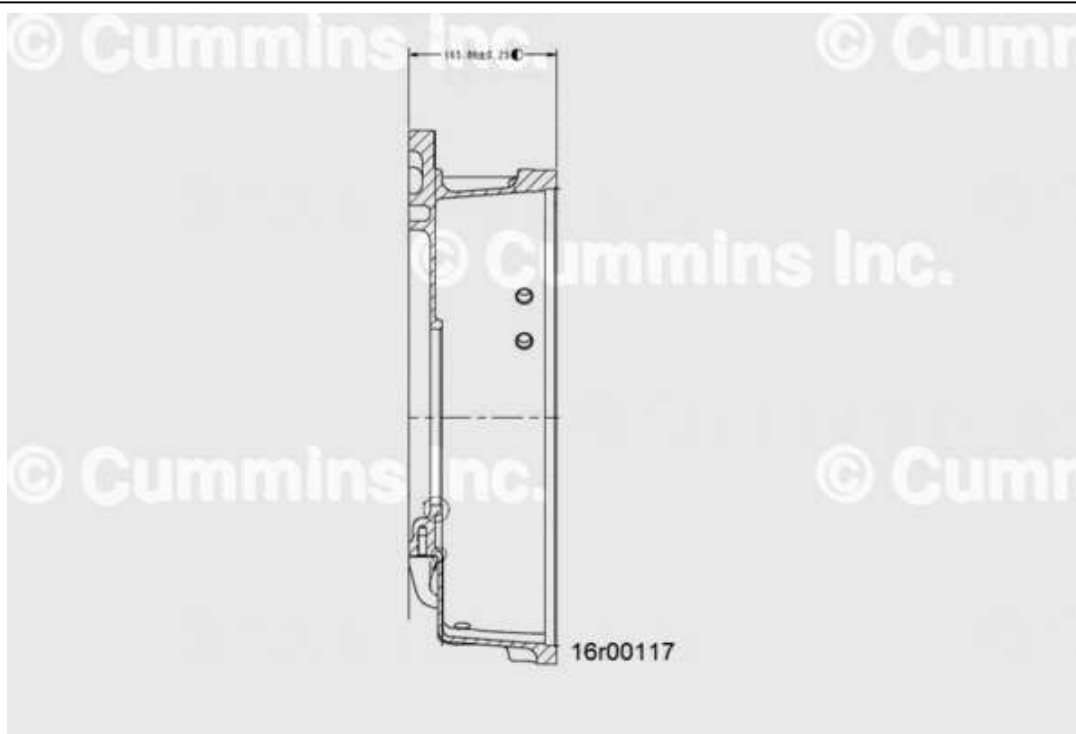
, Flywheel Housing Depth Dimension for Flywheel Housing, Part Number 3693141 or 3695287.
